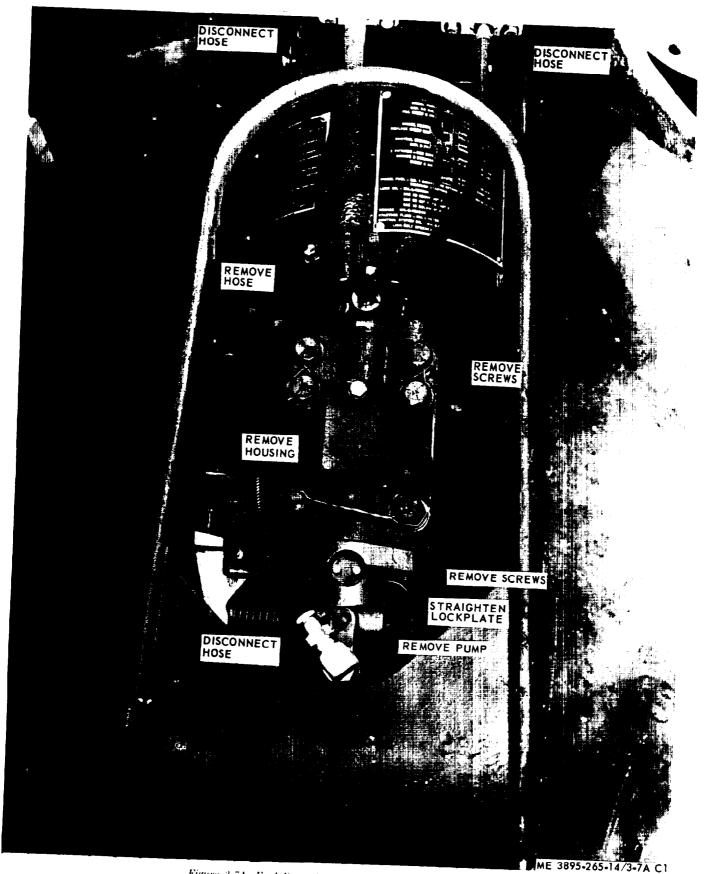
A. Fuel lines, fuel tank, fuel pump, and fuel pump drive housing removal and installation (SN 180M-3001 through 180M-3170).
